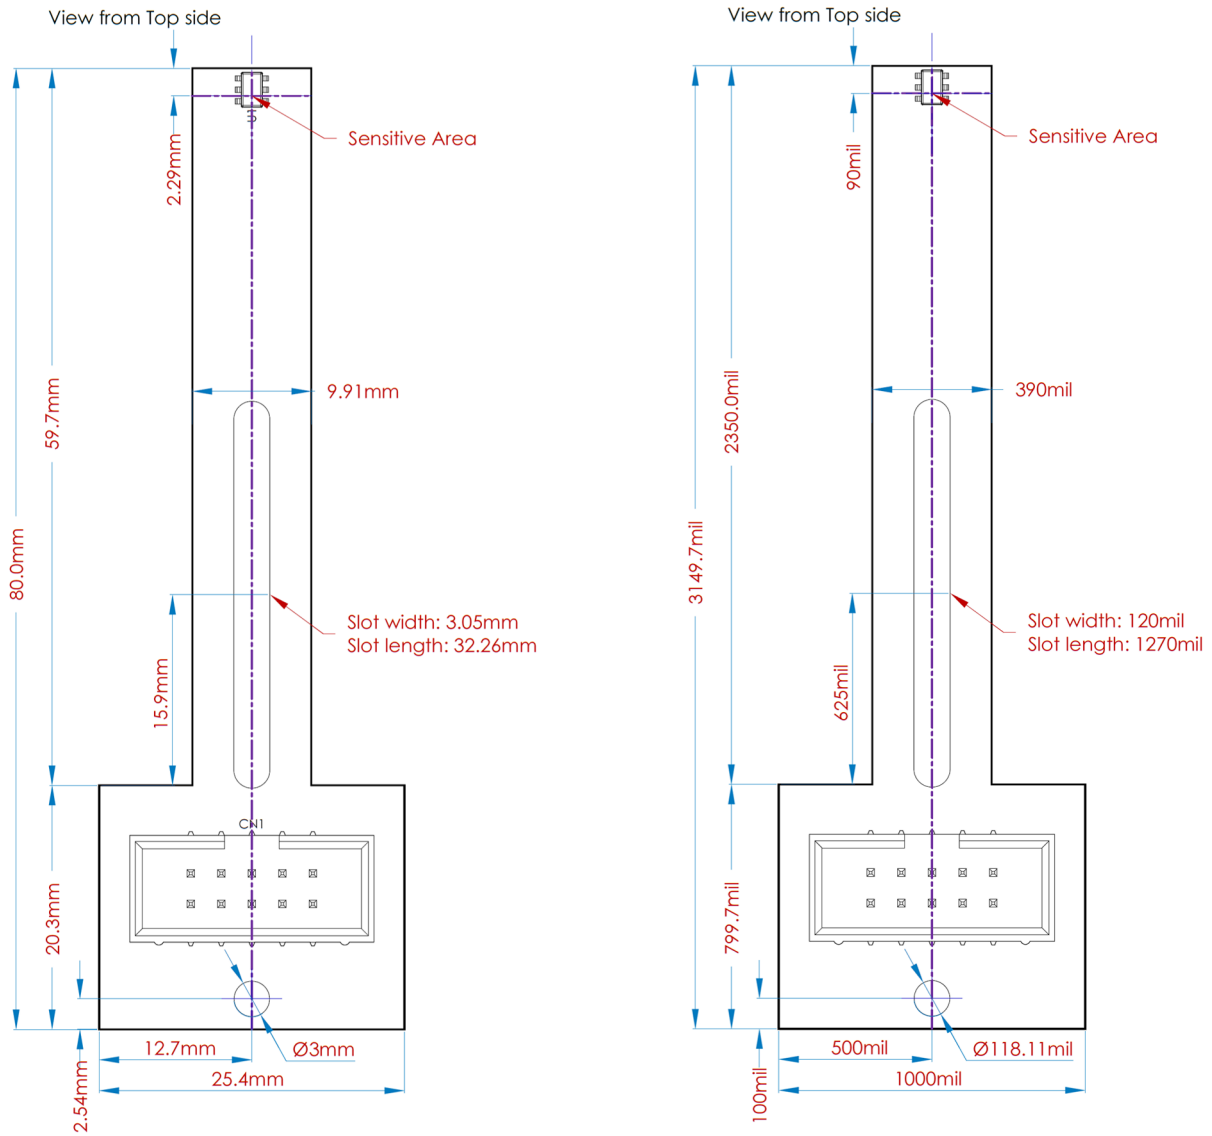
TBMV300-Q-LT I²C and SPI Mechanical Dimensions (In mm and mils)
